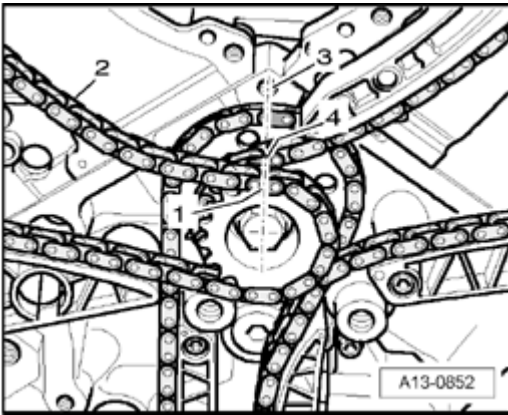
Copper-Colored Chain Link, Threaded Hole & Camshaft Timing Chain
